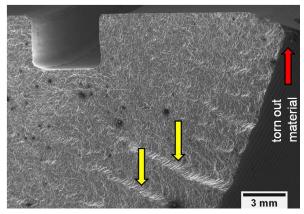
Surface fracture in place of crack origin, fatigue lines, split off material
